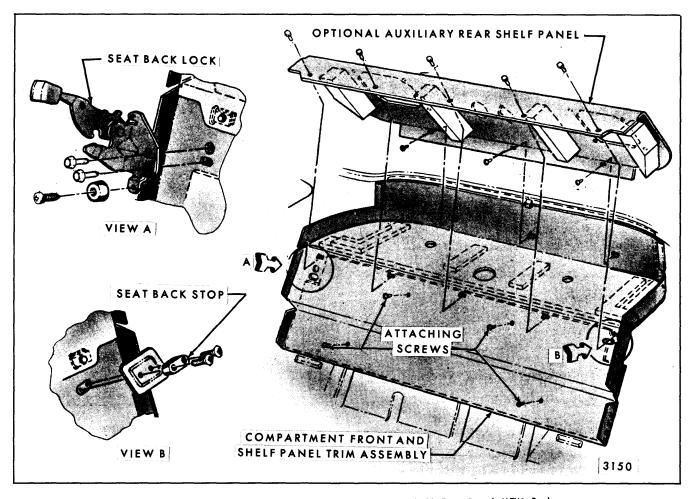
Compartment Shelf Trim and Auxiliary Shelf Trim Panel "Z" Styles
